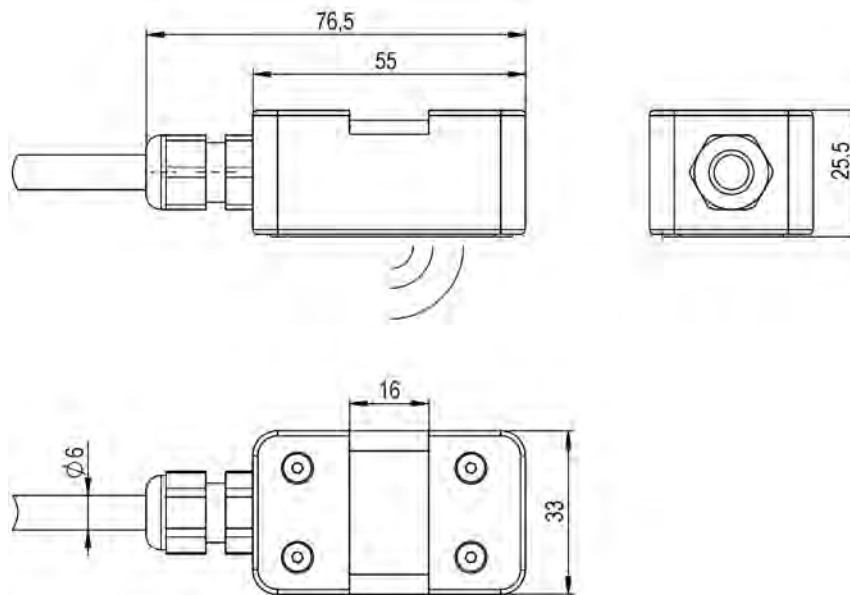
Dimensioned drawing clamp-on sensor Type NIC-CO01
